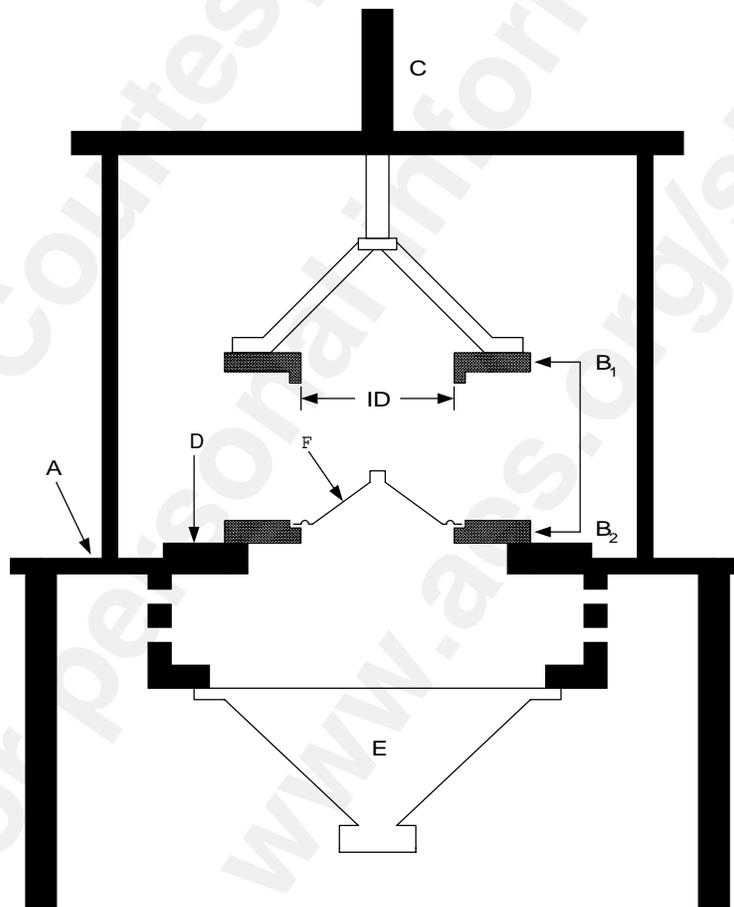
Test fixture showing test table A, top clamp ring  $B_1$ , bottom clamp ring  $B_2$ , top clamp ring holder and pressure applicator C, bottom clamp ring holder D, driving loudspeaker E, and cone under test F.
